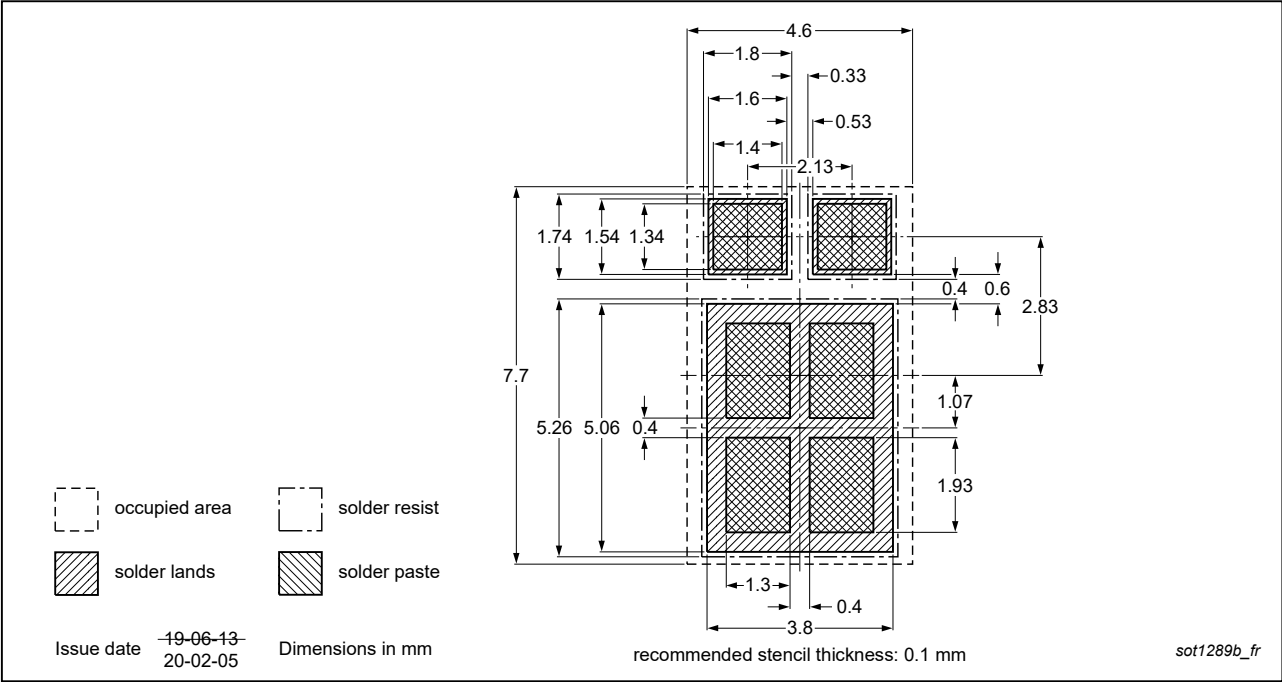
Reflow soldering footprint for CFP15B (SOT1289B)
